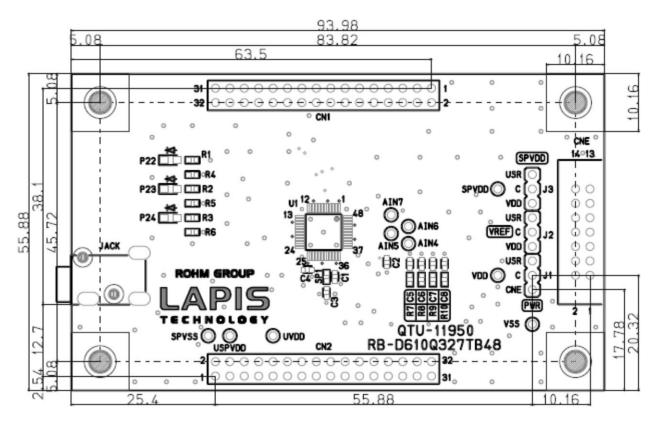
PCB dimensional outline diagram and layout of components (Top view)
